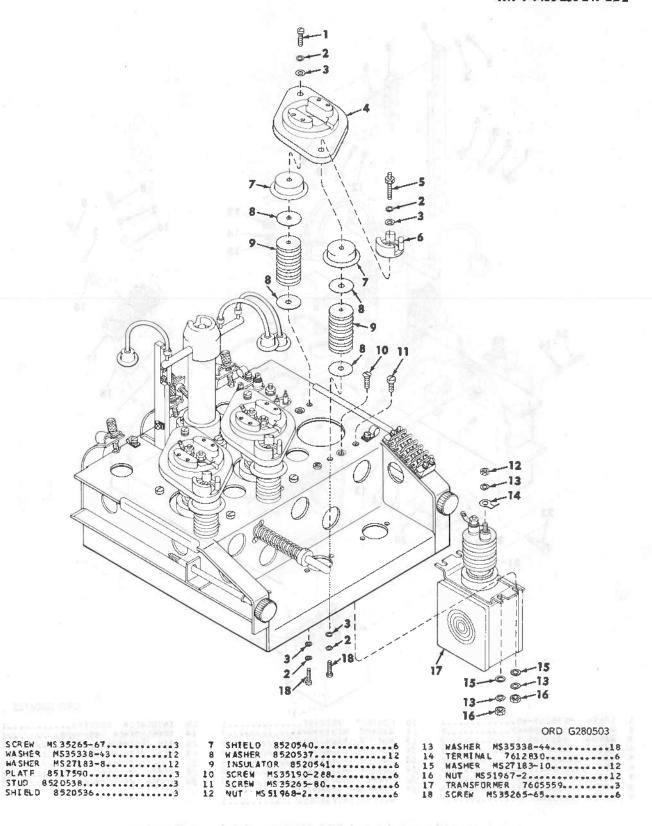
POWER SUPPLY SUBASSEMBLY /8520524/-PARTIAL EXPLODED VIEW
